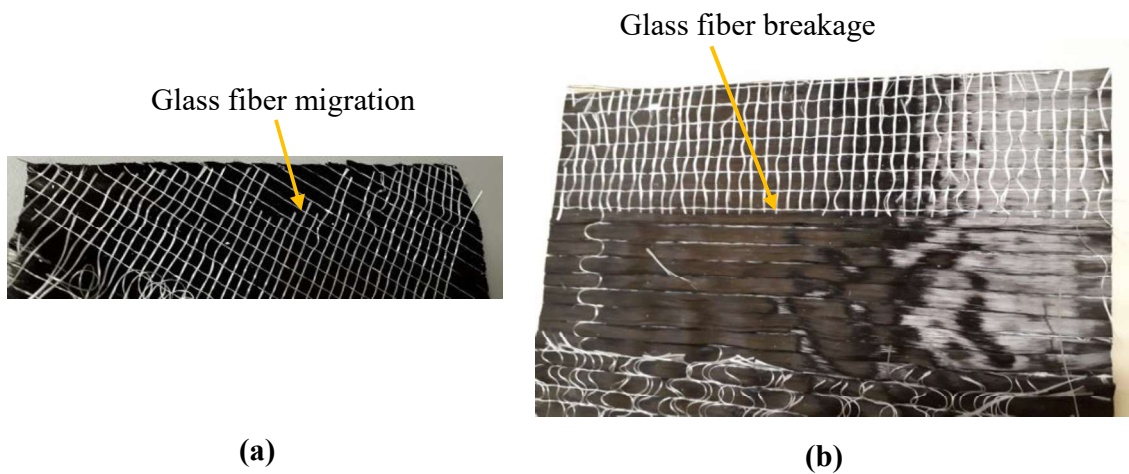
Clamped region of UD-NCF test specimens: (a) Fiber glass migration caused by low clamping force, and (b) fiber glass breakage caused by high clamping forces and sharp bends in the fixture.
